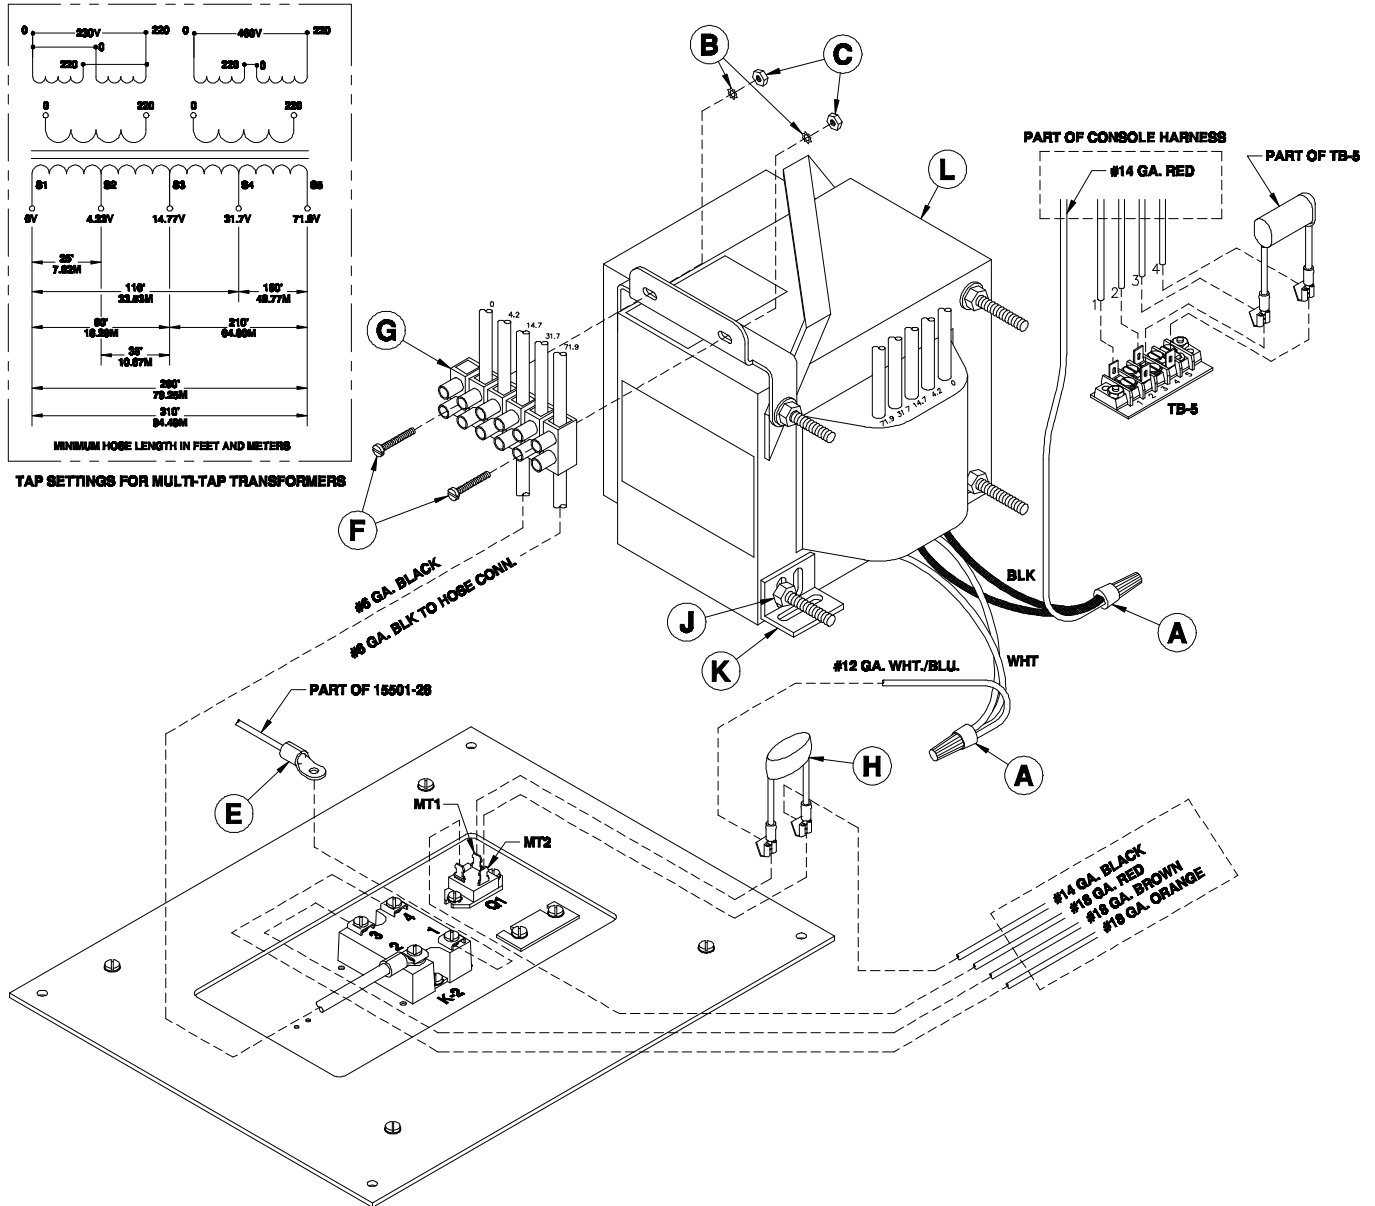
H-2000 Assembly (Part No. 15000-SIZE) Exploded View Sheet 3 of 4
